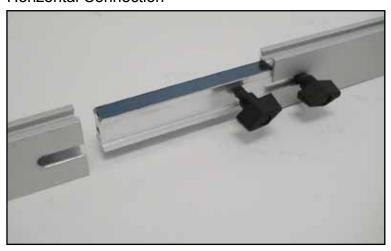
Detail A: Most horizontal extrusion connections have a patented expandable lock. This lock inserts into the groove of an opposing extrusion. Tightening the lock with the Hex Key Tool expands the lock and creates a strong positive connection.
